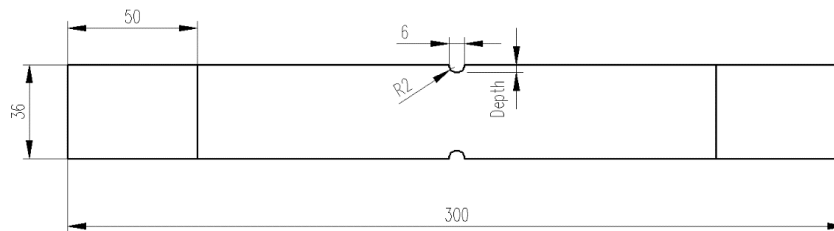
Drawing of double edge notch specimens (Depth: 2mm, 3mm and 4mm)
